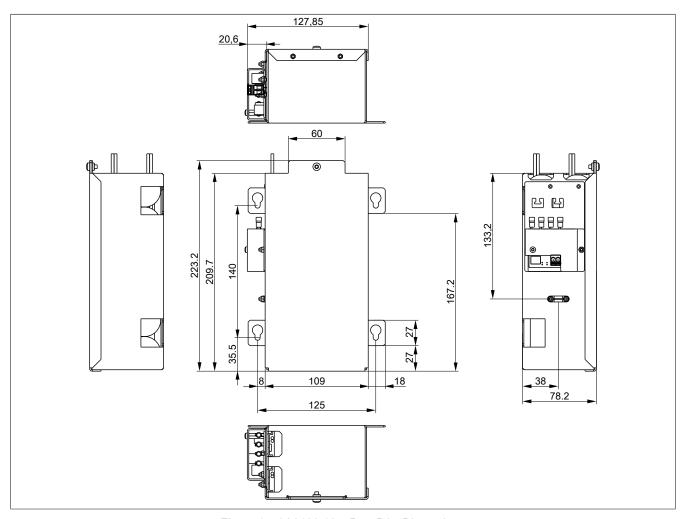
9A0100.16 ≥ Rev. D0 - Dimensions
